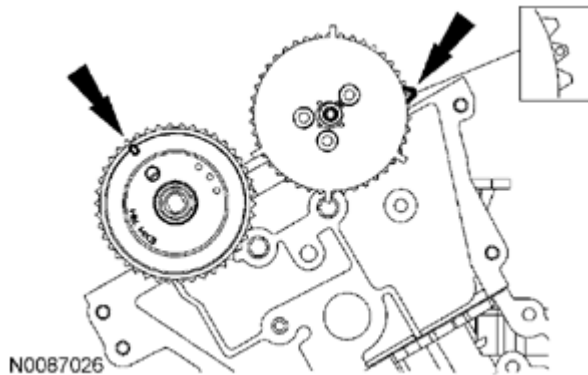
Identifying RH Camshafts Are In Neutral Position
